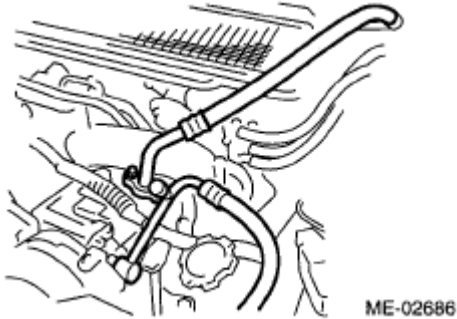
Identifying A/C Pressure Hoses From A/C Compressor
